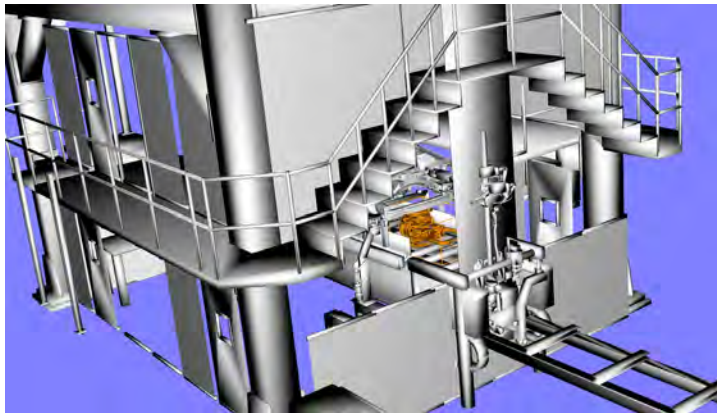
TC Large Environment: The spot-welding machine (highlighted in brown) is the rigid body, whereas the structures around it are considered to be the obstacles.
